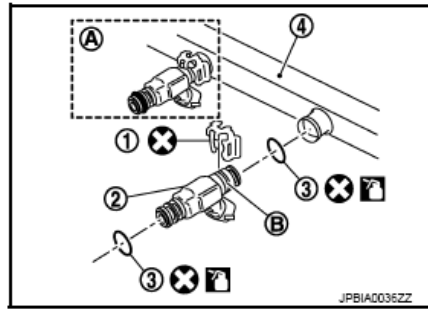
Identifying Fuel Injector, Fuel Tube And O-Ring
